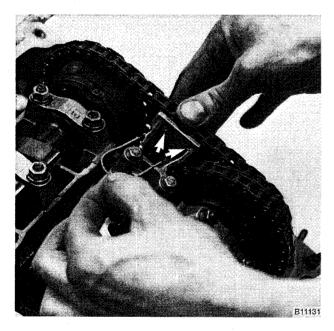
Secondary timing chain tensioner being locked down on M50 engine. Press tensioner down and insert locking wire through holes (arrows). Tensioner on M52/S52 US engines vary slight-
